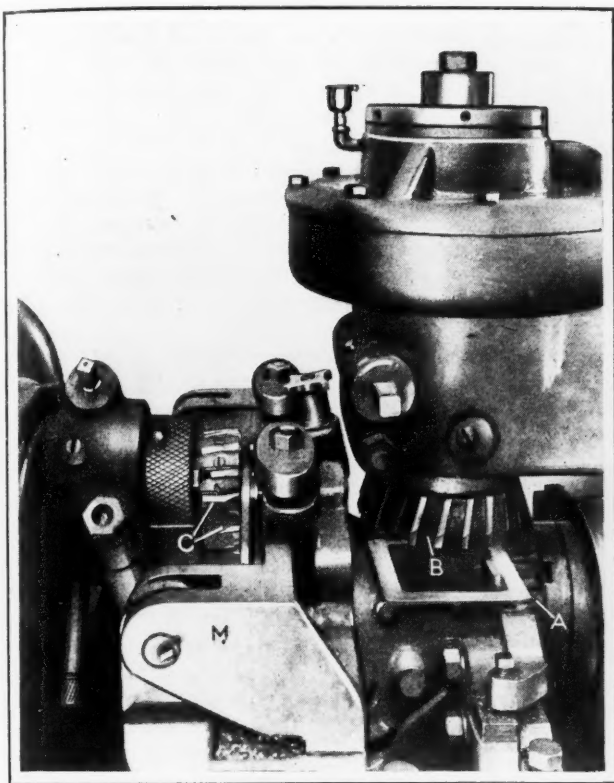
Machining Three Surfaces of the Transmission Case by the use of Four Milling Cutters
